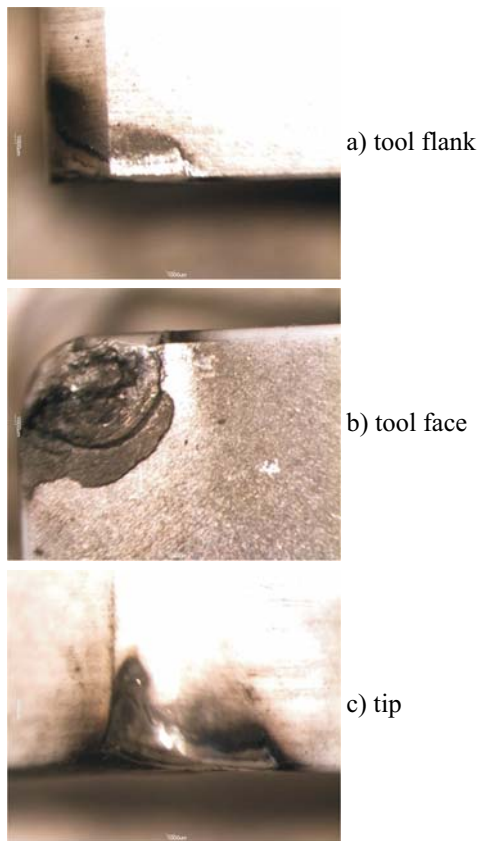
Tool wear – indexable cutting insert type D 250\_3
